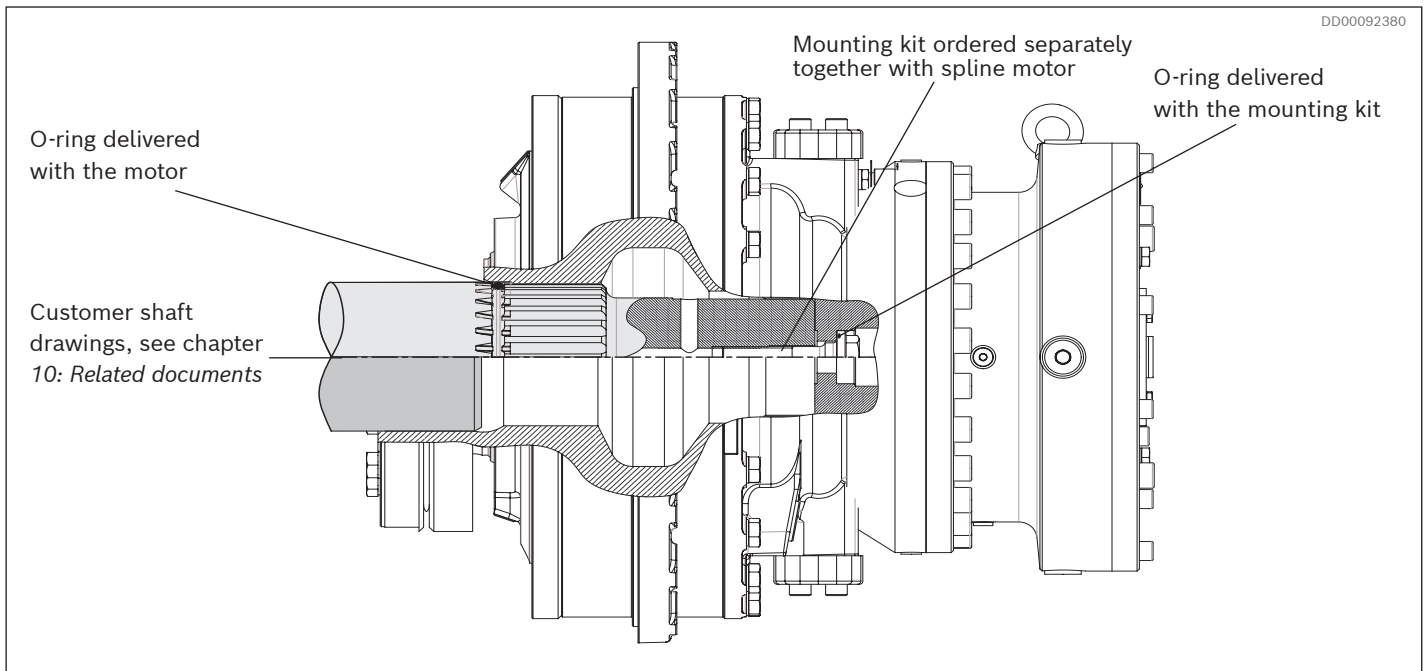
Example torque arm mounted CA motor with spline or shrink disc coupling and BICA brake on customer shaft
